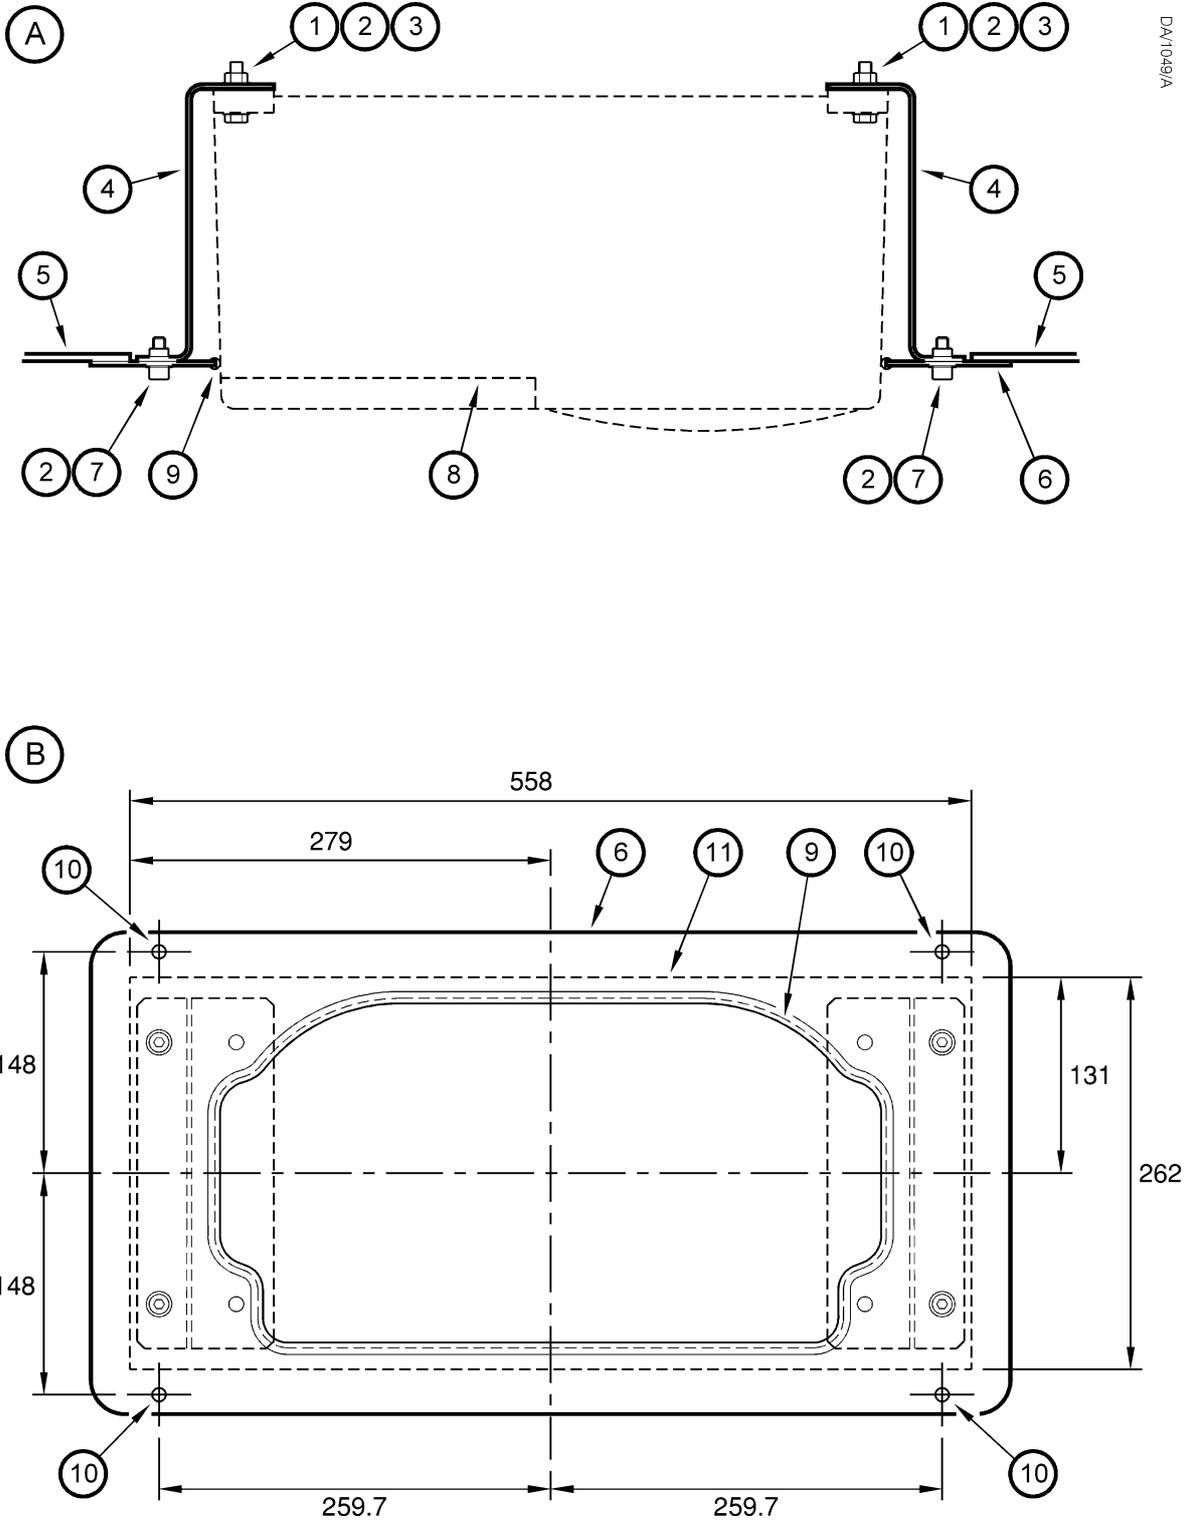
Panel mounting arrangement/dimensions (mm): sheet 1 of 2
